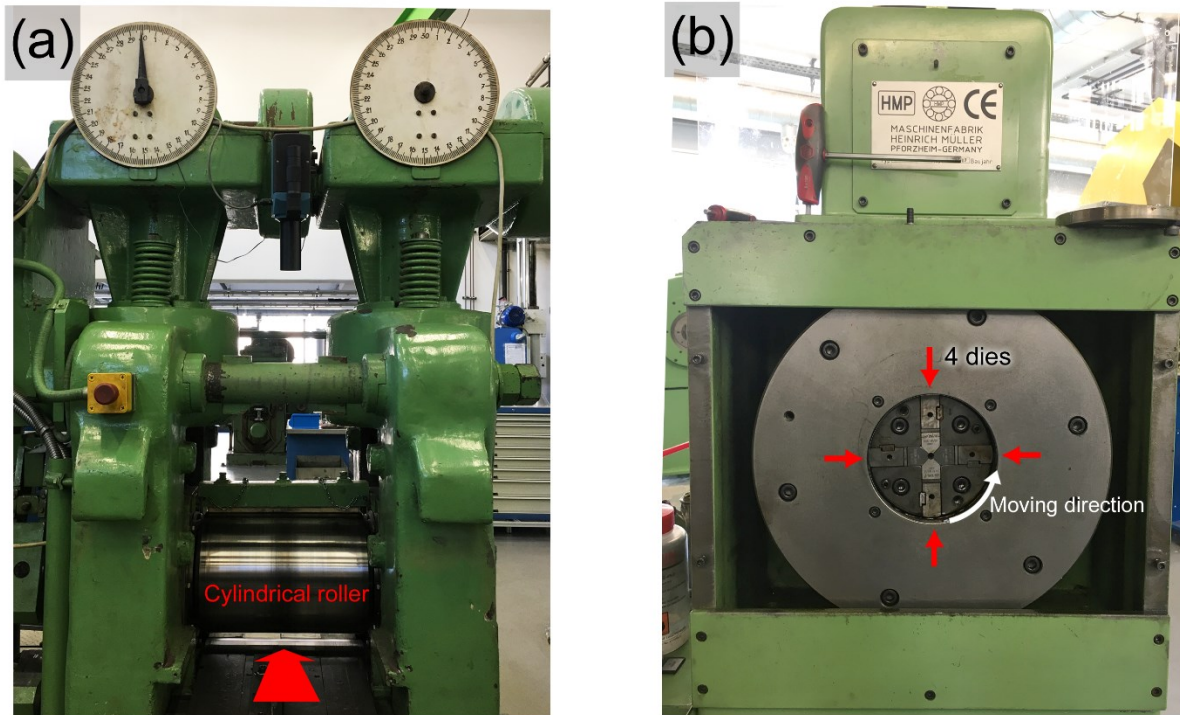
(a) Rolling machine and (b) rotary swaging machine at the IFW-Dresden.
